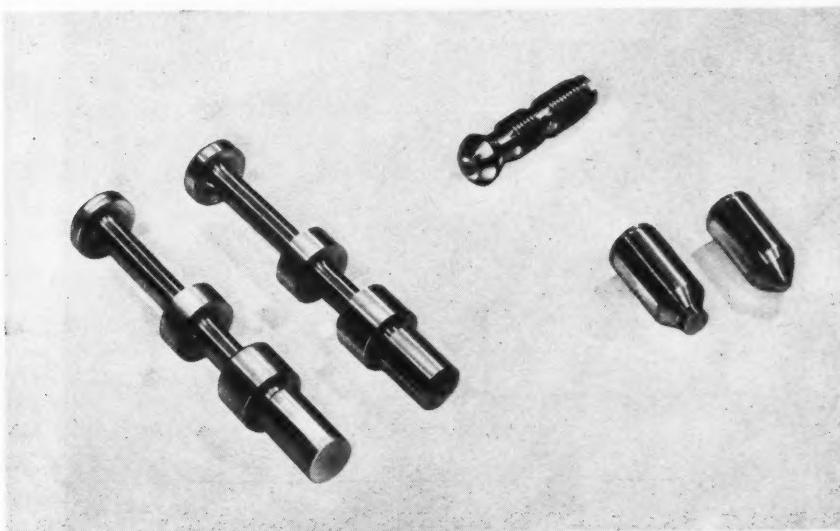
Group of small automotive parts that are automatically fed and handled during machining and inspection operations by means of magazines and hoppers
